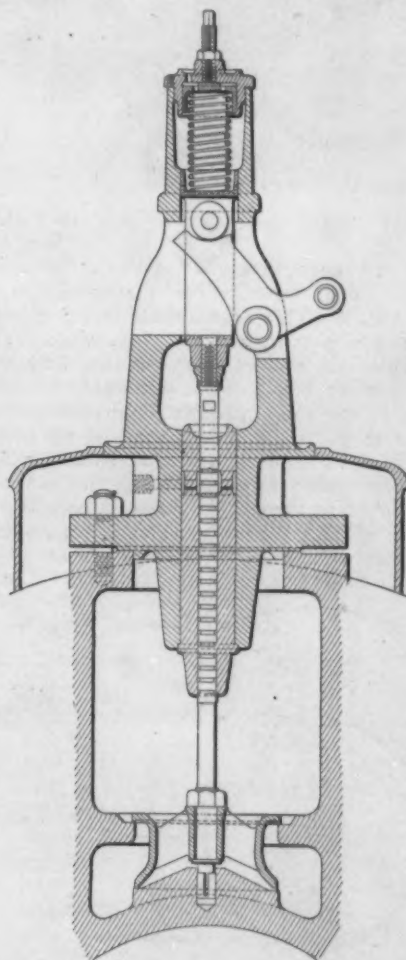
Sectional Elevation of the Admission Valve, Showing Constructional Details.
